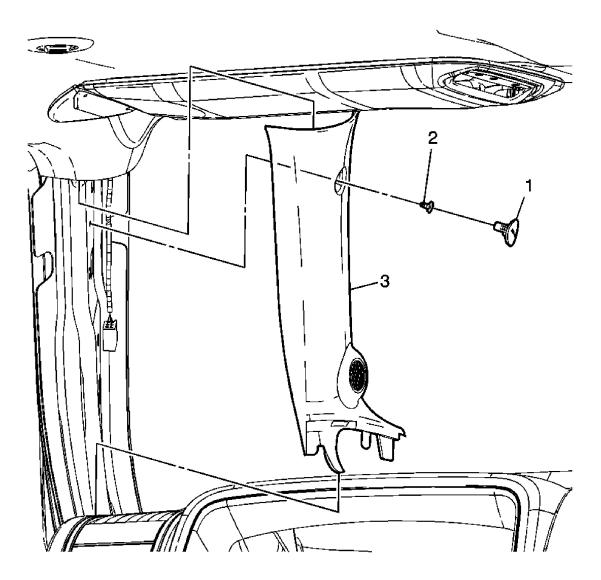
Windshield Pillar Garnish Molding Replacement Courtesy of GENERAL MOTORS CORP.
